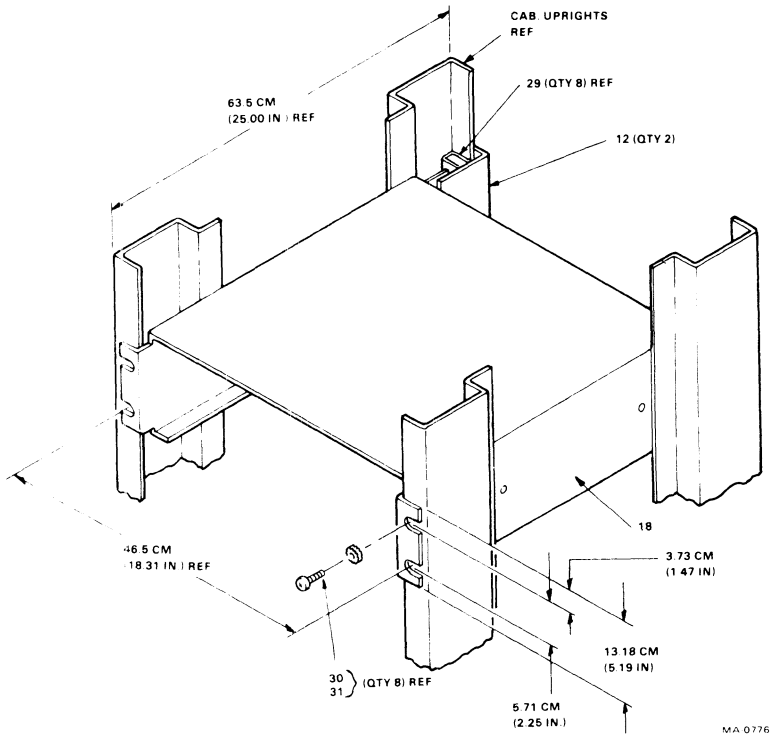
BA11-NE and BA11-NF Cover Mounting Dimensions
